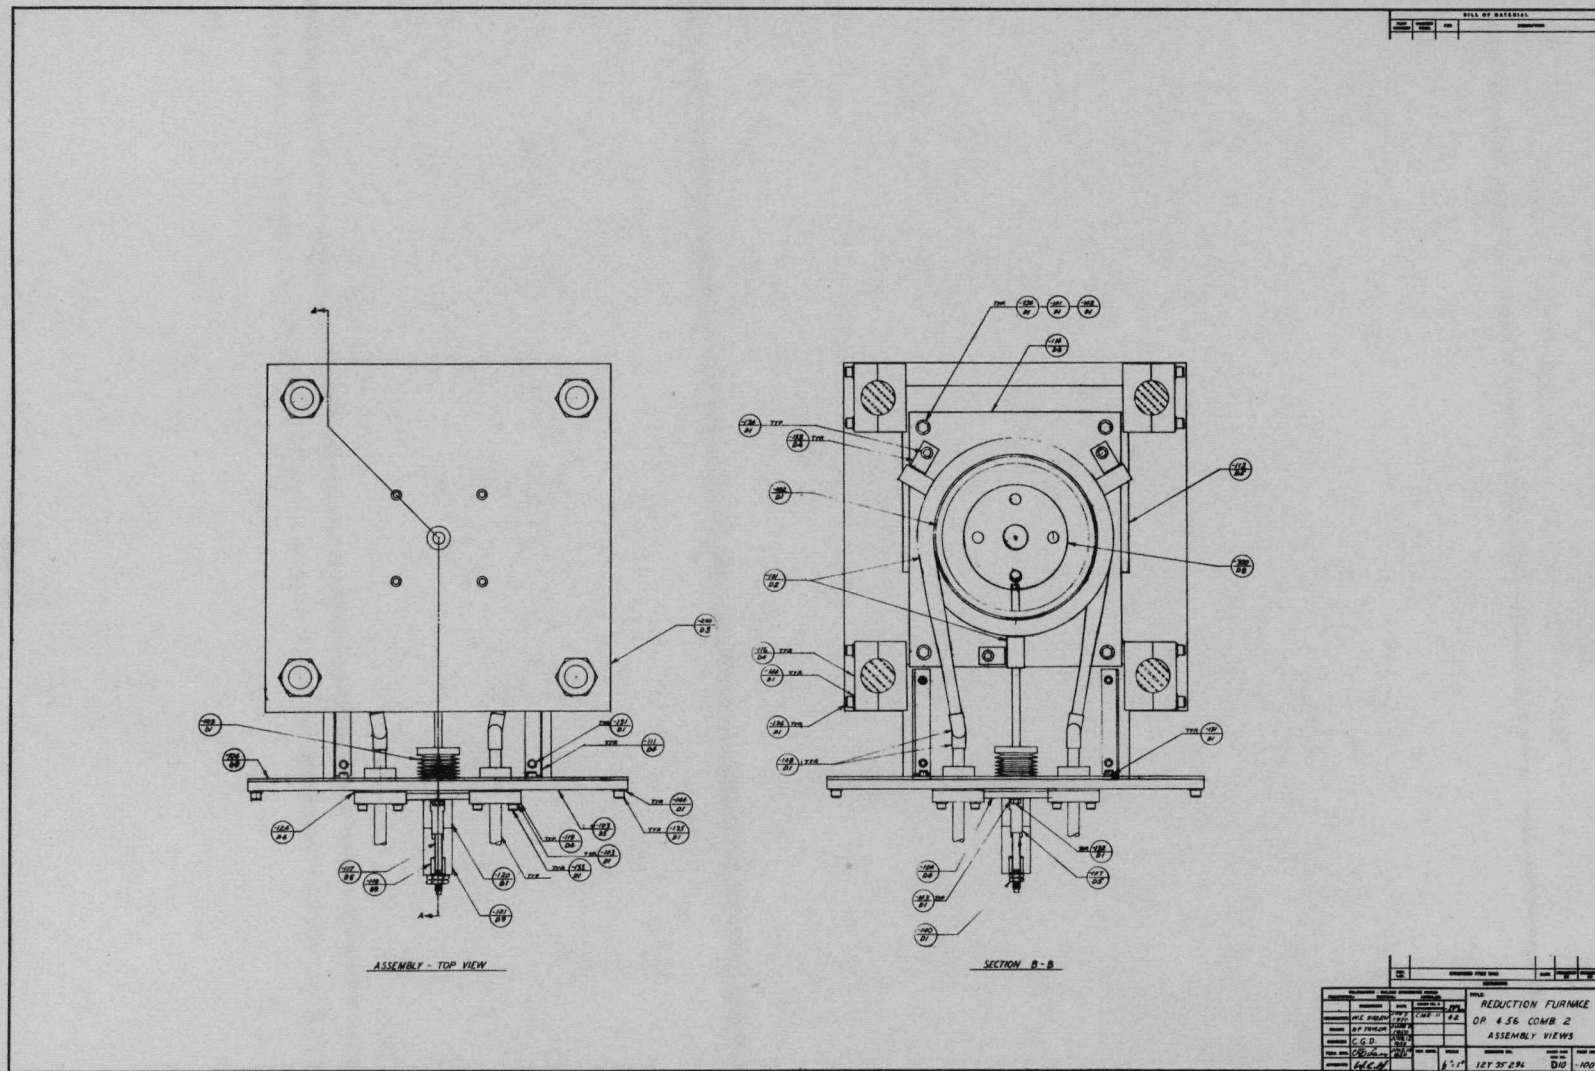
Design layout of reduction furnace coil and sleeve mounting assembly.
